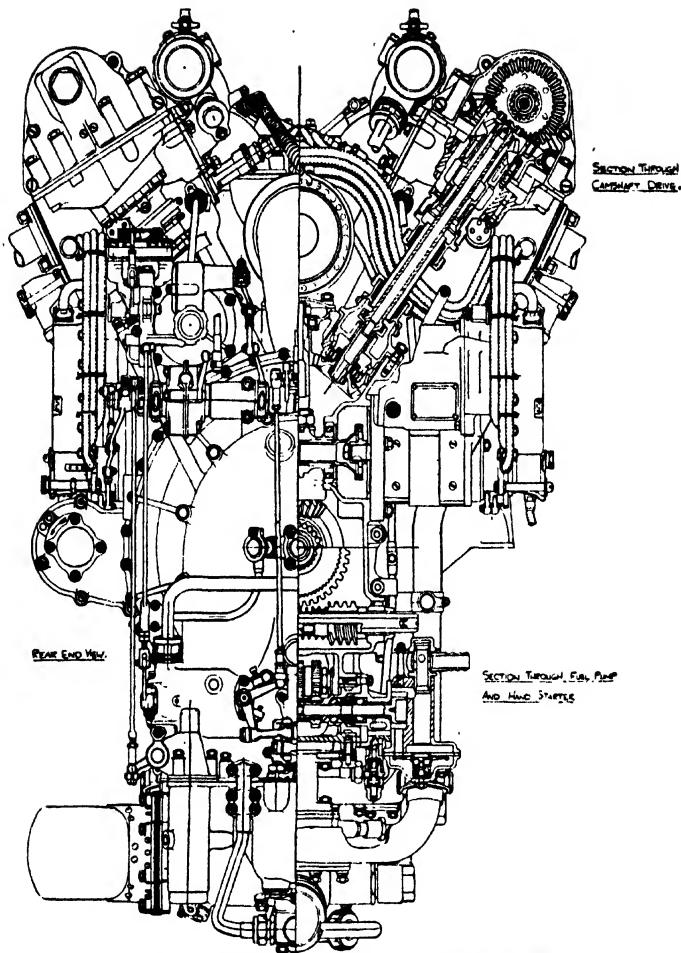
Sectional View of Supercharged Kestrel Engine.
